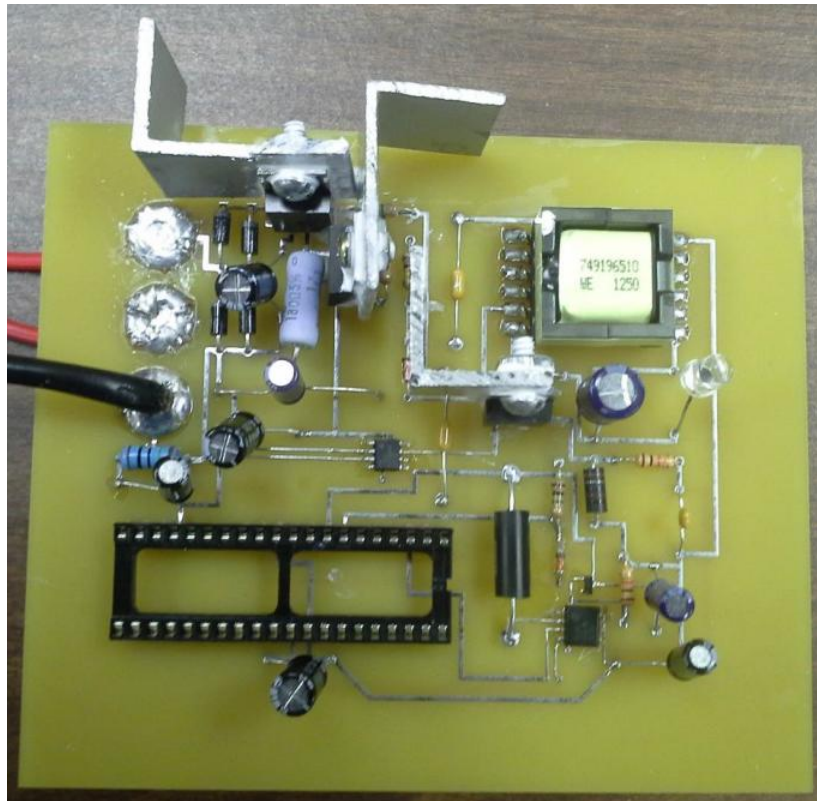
The complete PCB with soldered components as seen from top view.
